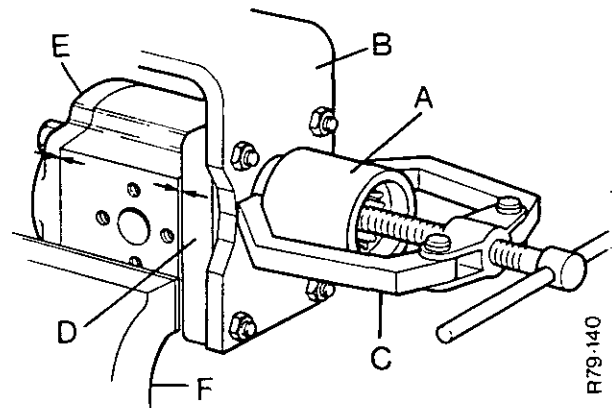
REMOVAL OF THE PUMP COUPLING
